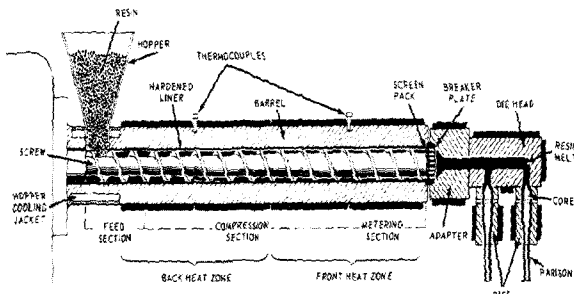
Cross-section of screw extruder for the extrusion of parison
